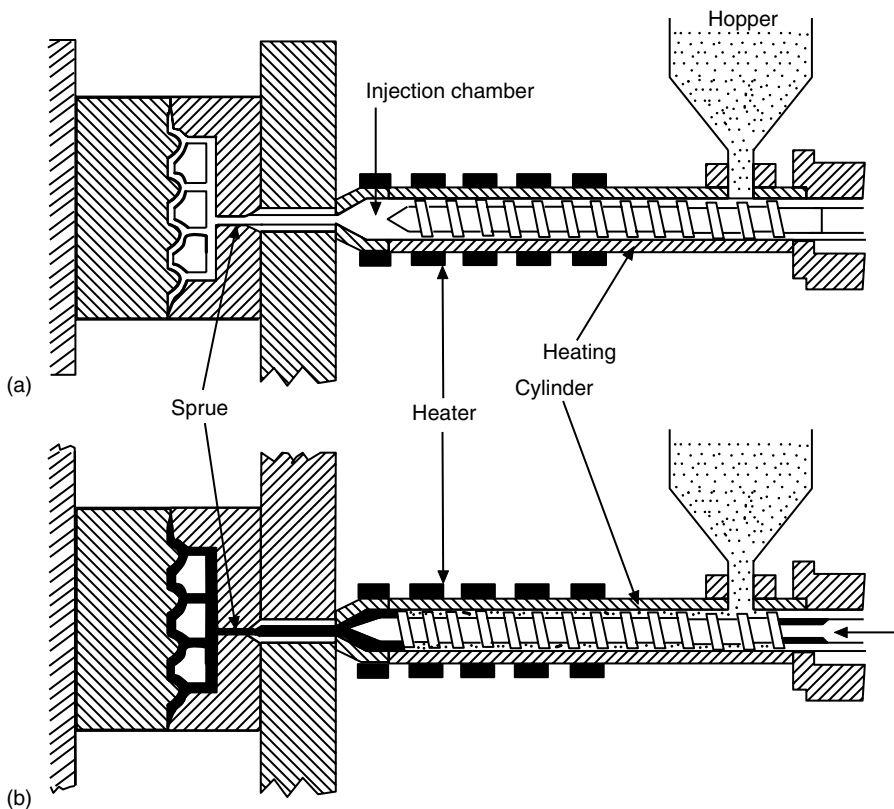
Cross-section of a typical screw-injection molding machine, showing the screw (a) in the retracted position and (b) in the forward position. (After Lukov, L. J. 1963. *SPE J.*, 13(10), 1057.)
